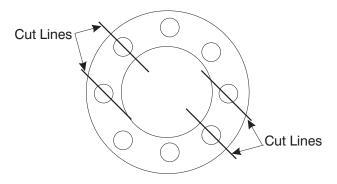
Cutting Pattern to Remove Shock Absorber from End Cap
